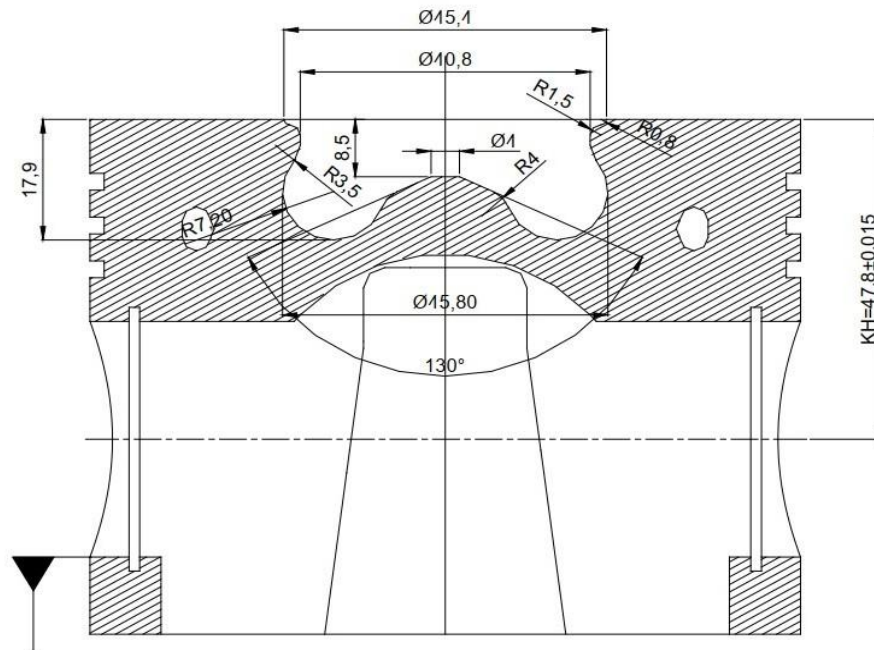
Geometry of the combustion chamber of the AVL 5402 engine [51]
